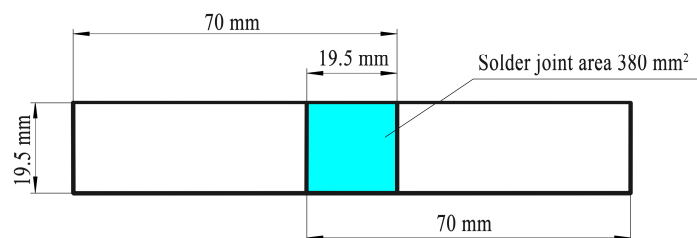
The lap joint diagram of vacuum diffusion welding (VDW).
